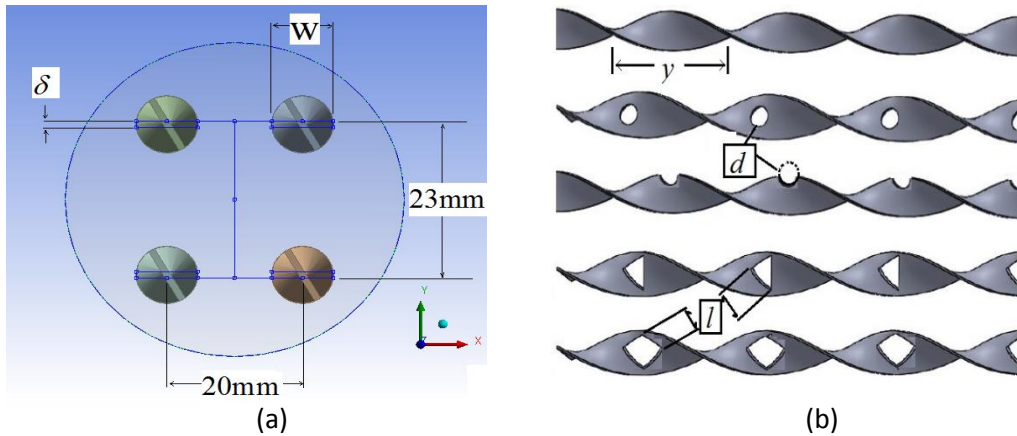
Schematic view on quadruple arrangement for all models; (a) Inlet cross sectional, (b) Cuts dimensions.
